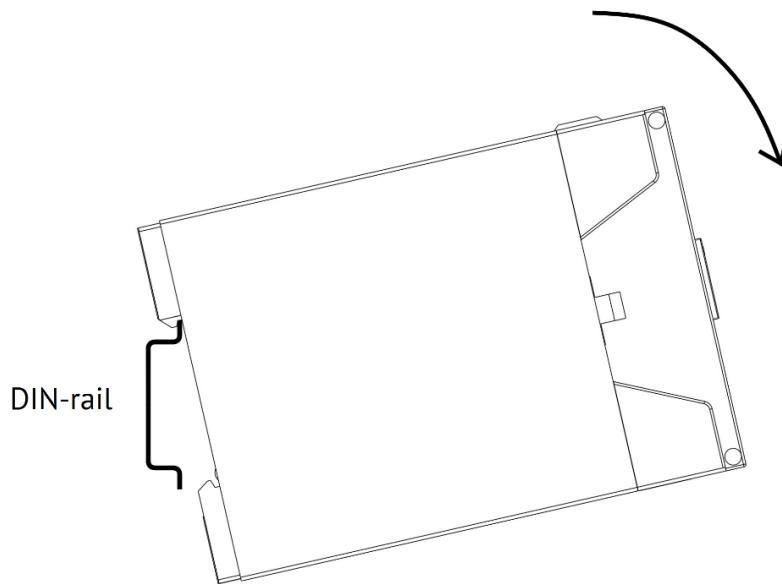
ENMV-1 installation to 35 mm DIN-rail
